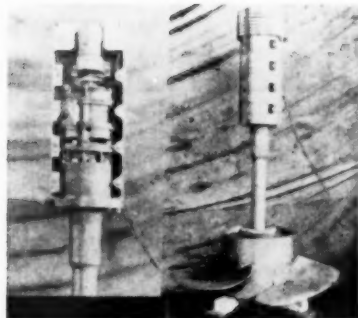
EXTERNAL VIEW AND SECTION OF ELECTRICAL ADJUSTABLE-BLADE OPERATING MECHANISM
